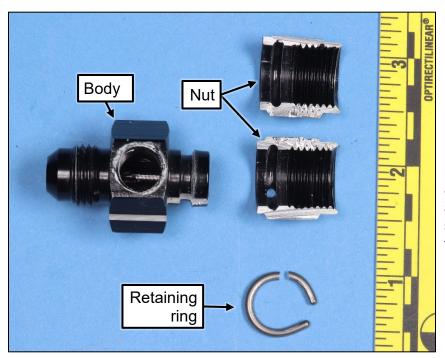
Overall view of the fuel pressure adapter fitting after removing the 45 degree fitting attached to the side of the adapter fitting, torque testing, and sectioning to remove the nut from the adapter body.
